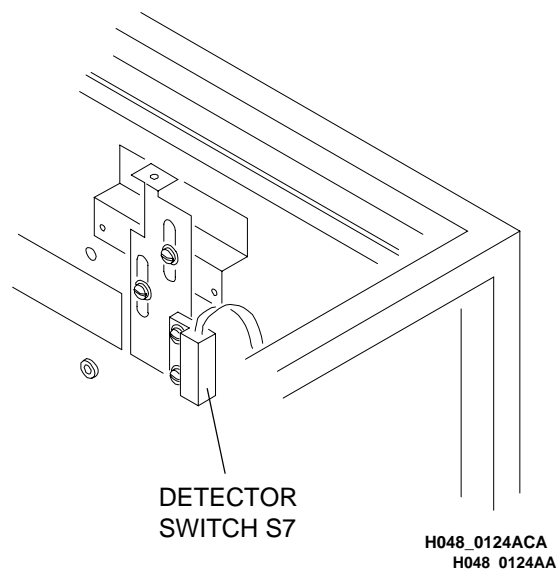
Adjusting the Non-Drive Side Switch Assembly
